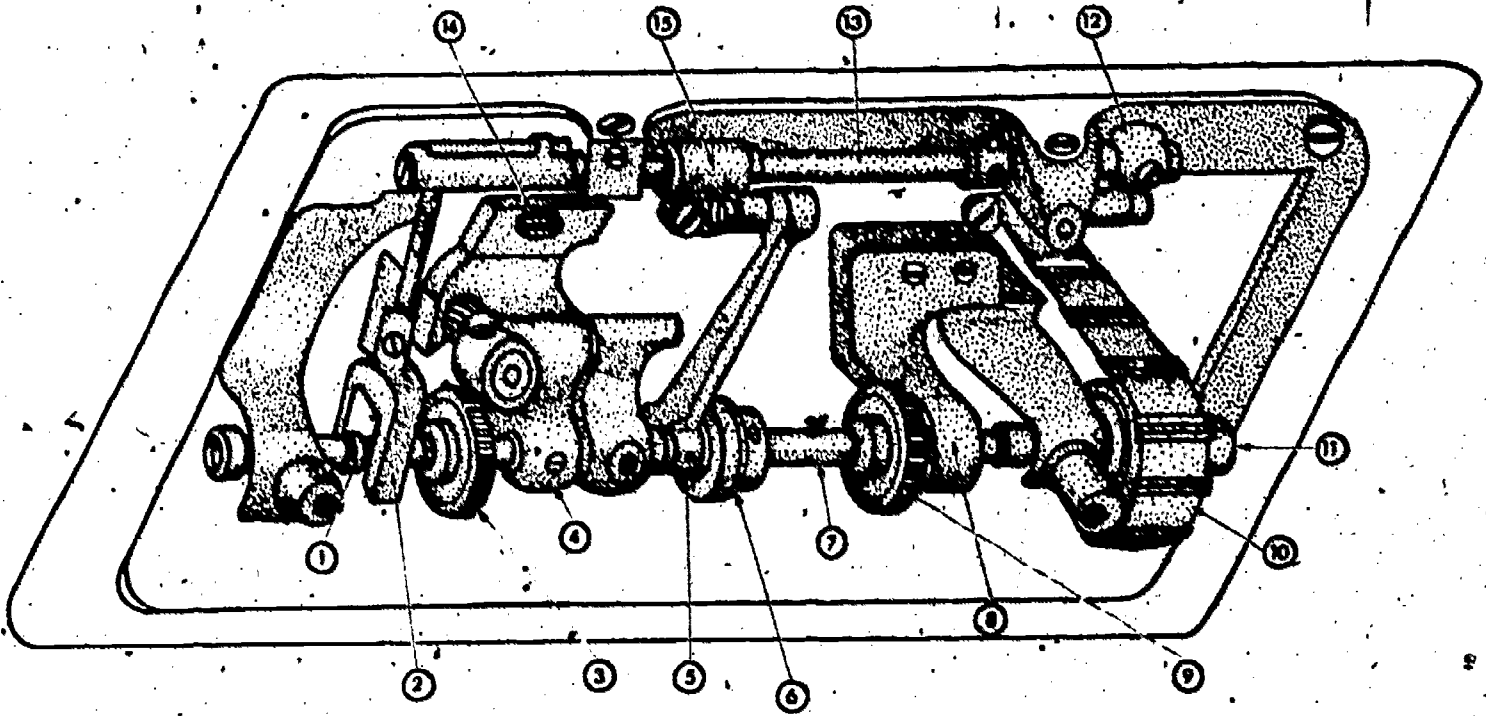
Hook Driving Shaft and Feed Driving Rock Shaft Assemblies,
